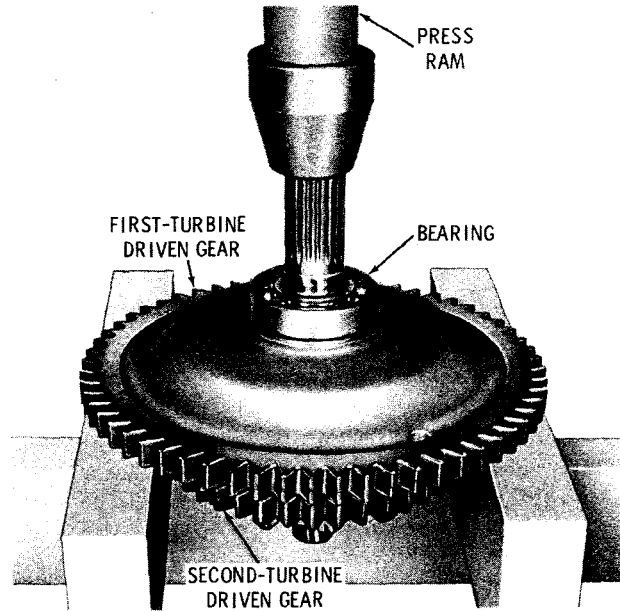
Pressing second-turbine driven gear assembly from freewheel clutch assembly
